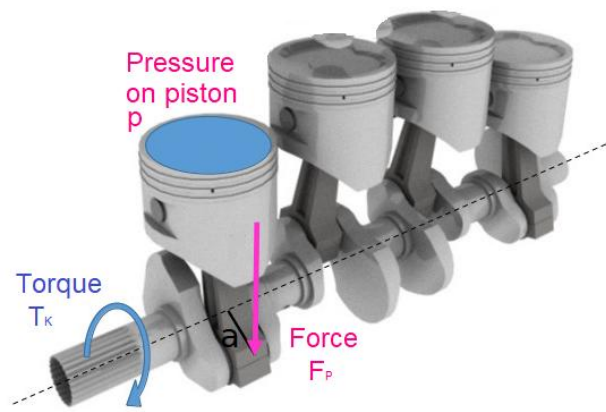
The pressure p performed on the piston of an internal combustion engine due to the explosion of fuel and expansion of gases
